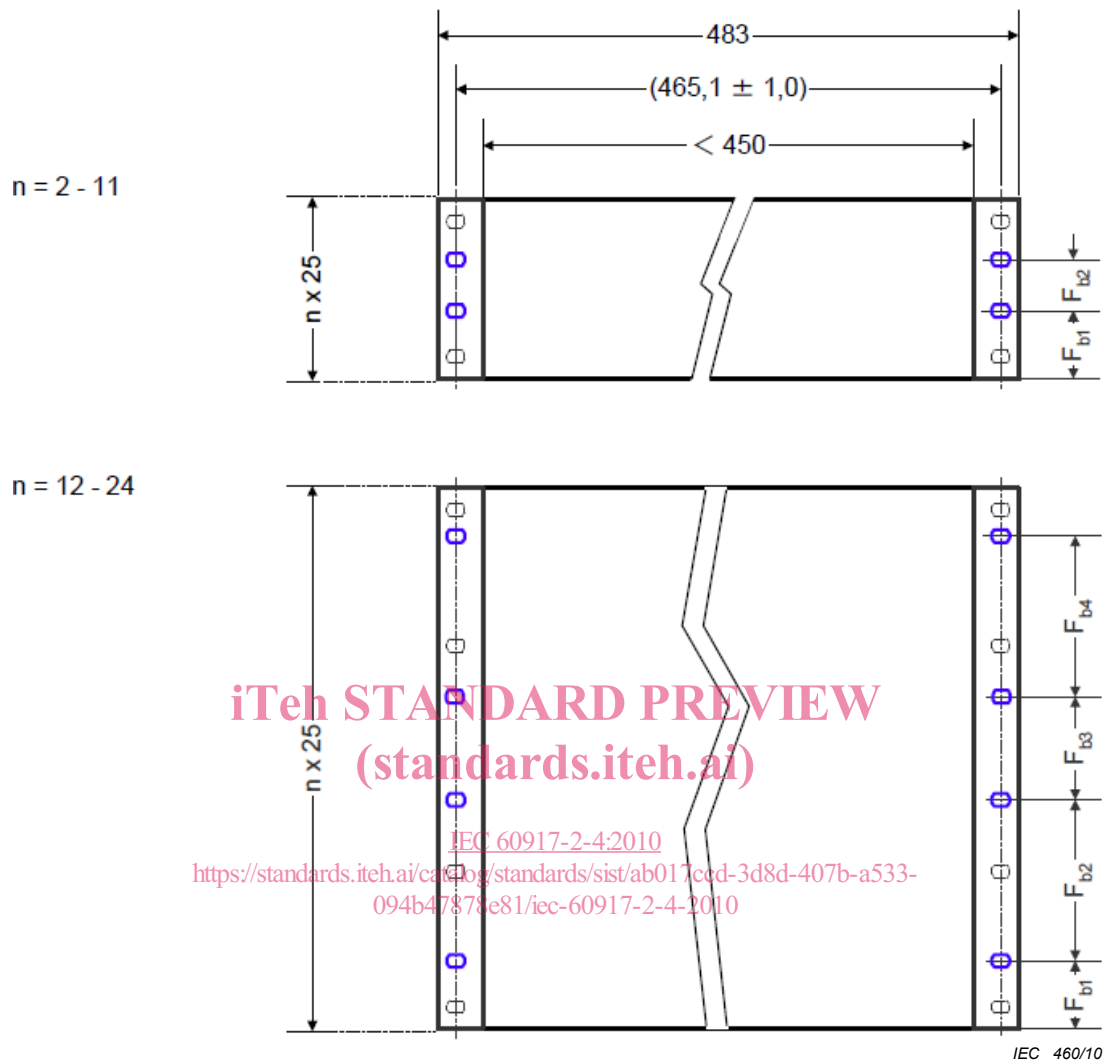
Mounting hole arrangements of the adaptor flanges, mounting layout referred to the bottom pitch lines of the metric subracks or chassis
